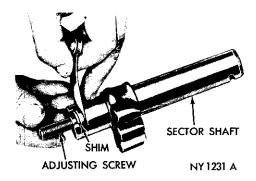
Measuring Cross Shaft Adjusting Screw End Clearance
